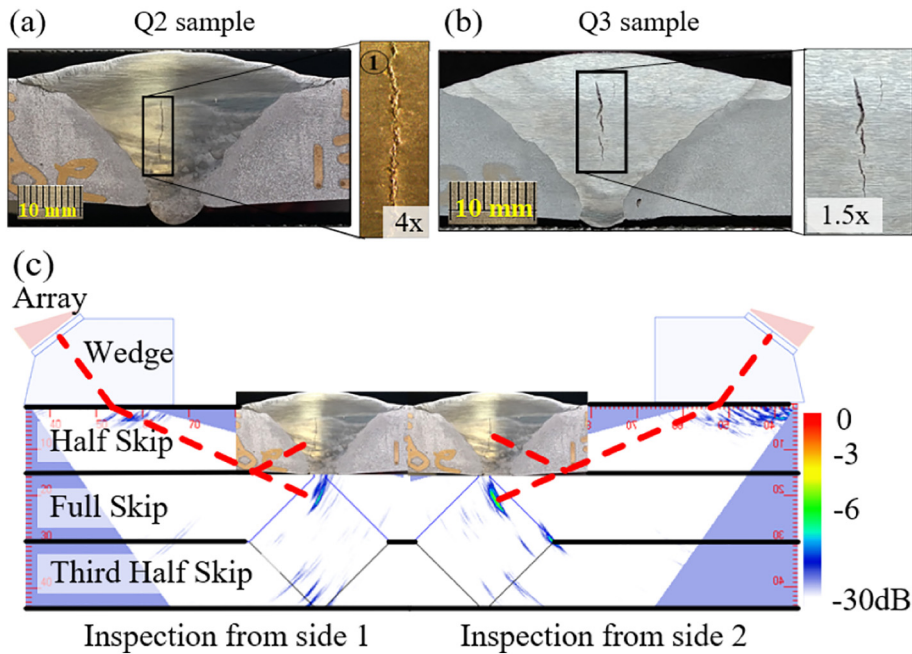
A macrograph sample cut from the welded section of (a) Q2 and (b) Q3 samples including successfully induced cracks. (c) Beam tracing to the strongest indications of the S-scan image acquired at the location of the crack for Q2 sample.
